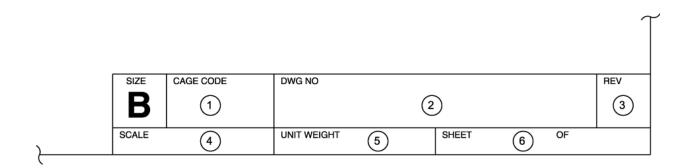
Title Block Entries on Aerospace and Ground Support Equipment Drawings (Sheet 2 of 2)
